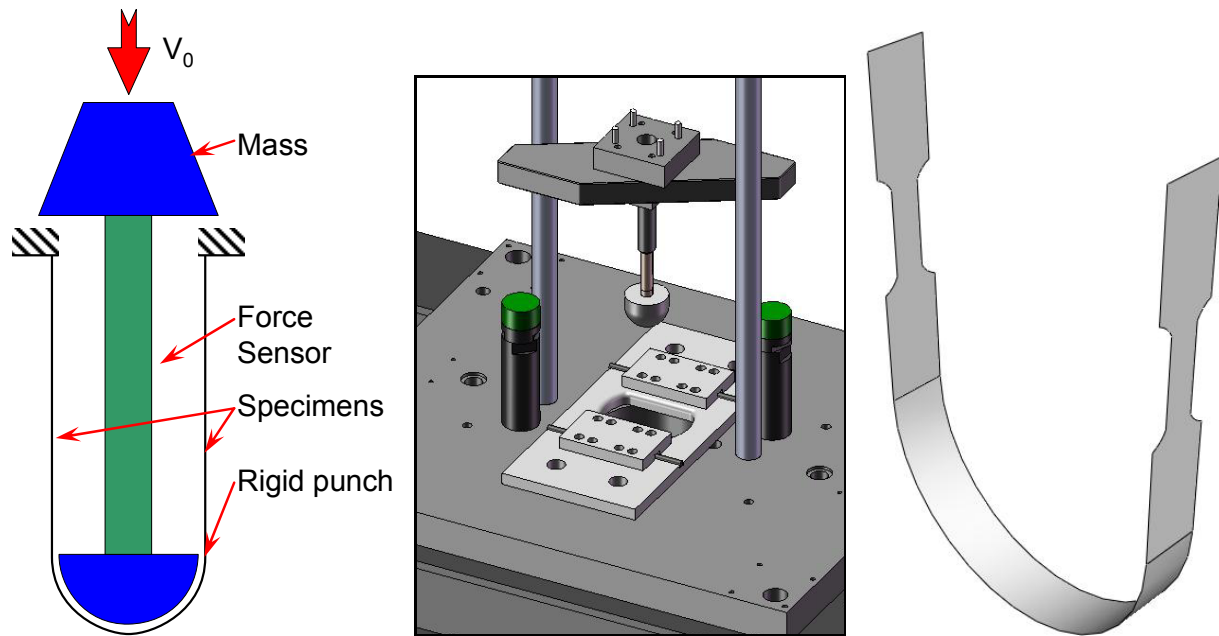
Fixture and specimens developed for tensile testing of sheet metals in a drop tower. The schematic shows how the drop mass impacts onto a curved specimen that is clamped on the top (left). The CAD model shows the clamping fixture, force sensor, and impacting tup in the context of the drop tower (center). The image on the right shows the curved specimen with dogbone specimens machined into the sides. After Chan (2009).
